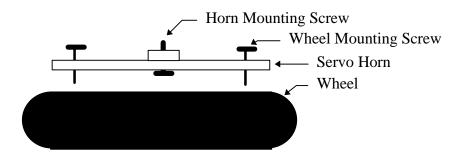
How to mount a servo horn onto a wheel. Be sure the horn mounting screw is placed into the horn before fastening the horn to the wheel with the other two screws.
